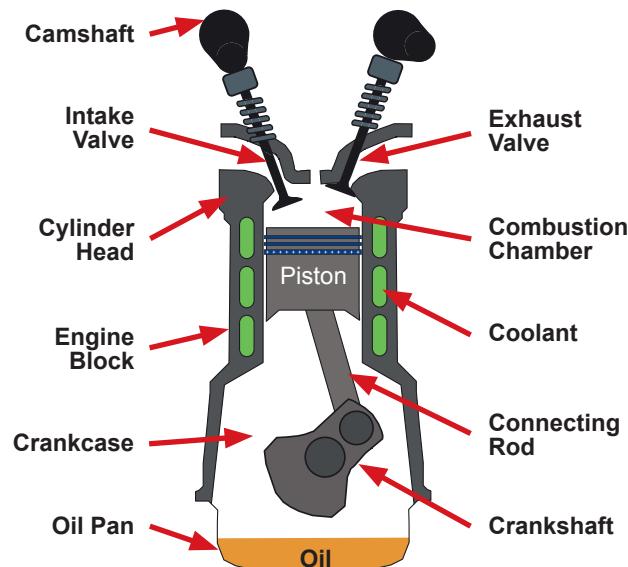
Dual Overhead Camshaft (DOHC) Engine
